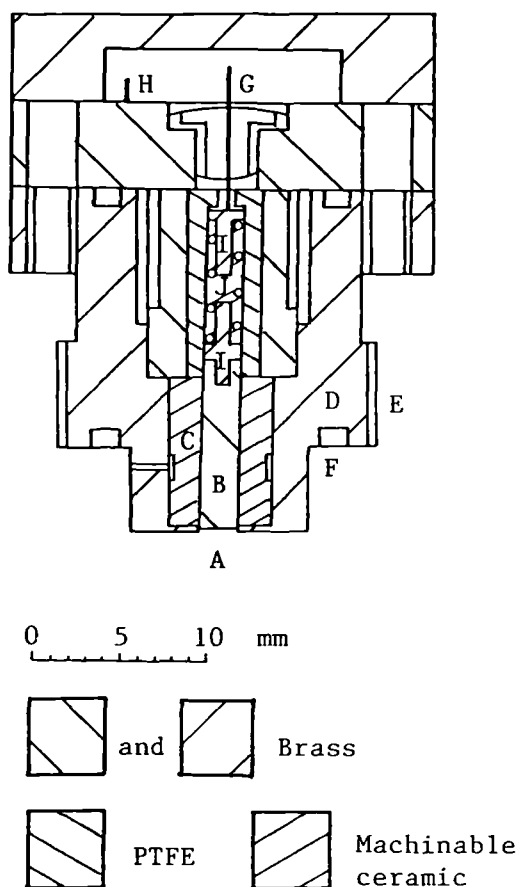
Electrostatic capacitance transducer used in high pressure apparatus : A, 50 nm aluminium coating on a 12 μm thick polyester film disc of diameter 6 mm; B, brass rod machined in end A, five equally spaced holes of 0.25 mm diameter drilled to a depth of 1 mm; C, machinable ceramic insulating sleeve; D, brass body; E, 26 t.p.i. 3/4" British standard brass thread; F, groove suitable for PTFE coated metallic and viton 'o' cross section sealing rings; G, ceramic sealed one pin electrical lead through; H, earth connection point; I, electrical contacts; J, spring which exerts a force of about 1 N (RS components plc) and ensures continued contact between film and brass rod.
